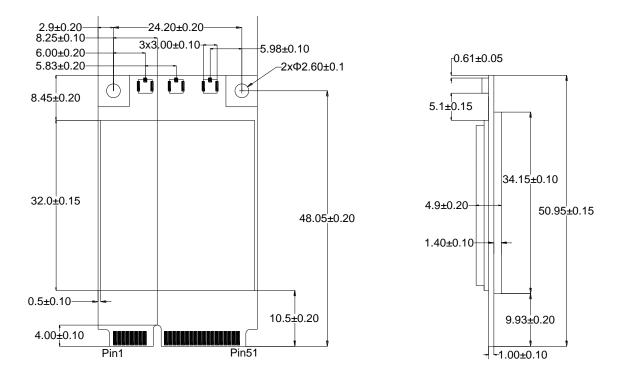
Mechanical Dimensions of EC20 R2.1 Mini PCIe-C
